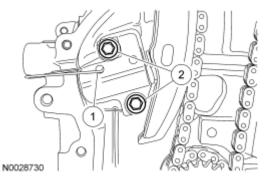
Locating Timing Chain Tensioner Bolt Courtesy of FORD MOTOR CO.
